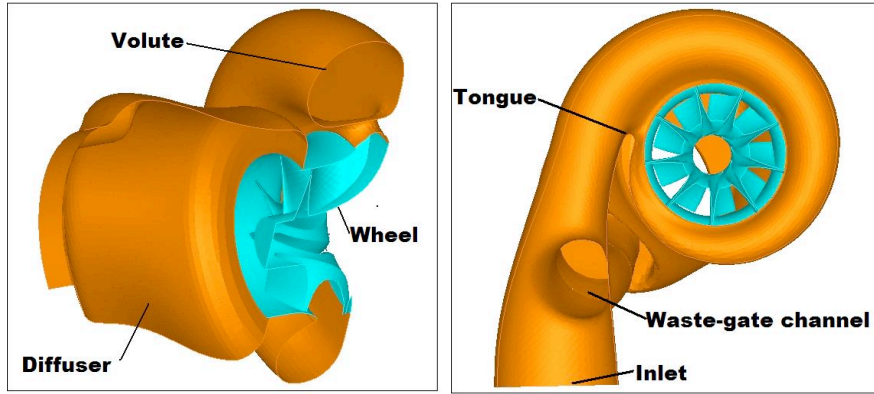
The different parts of a nozzle-less single scroll turbine.
